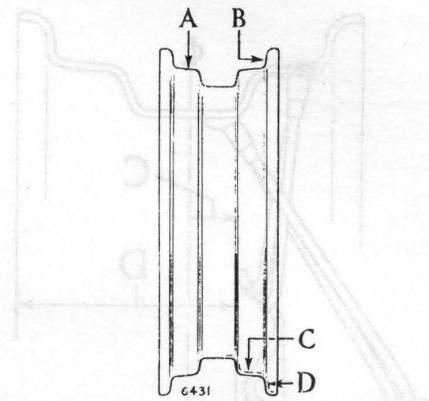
Rim lift and wobble. "A" and "B" indicate the check points to be used on the rim but points "C" and "D" can be used when the tyre is mounted.
